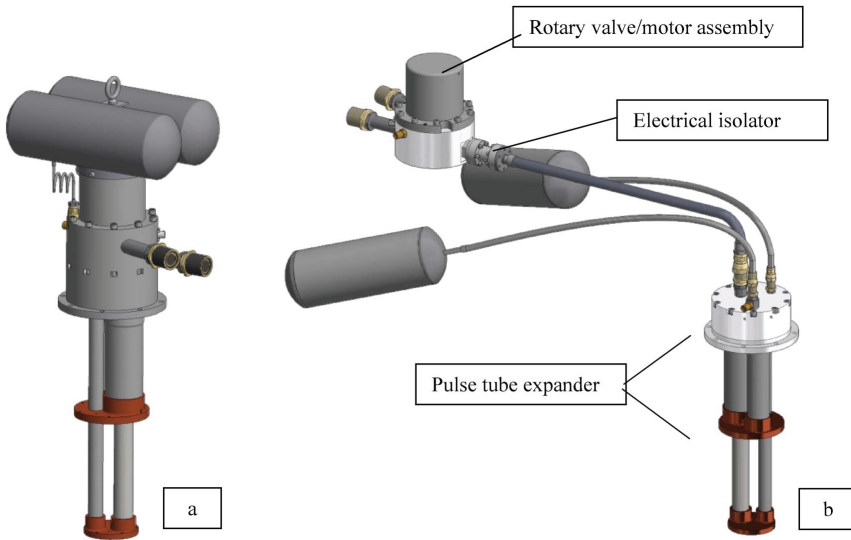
Large 4 K pulse tube cryocoolers. (a) standard design, model PT420S; (b) remote motor design, model PT420RM.
